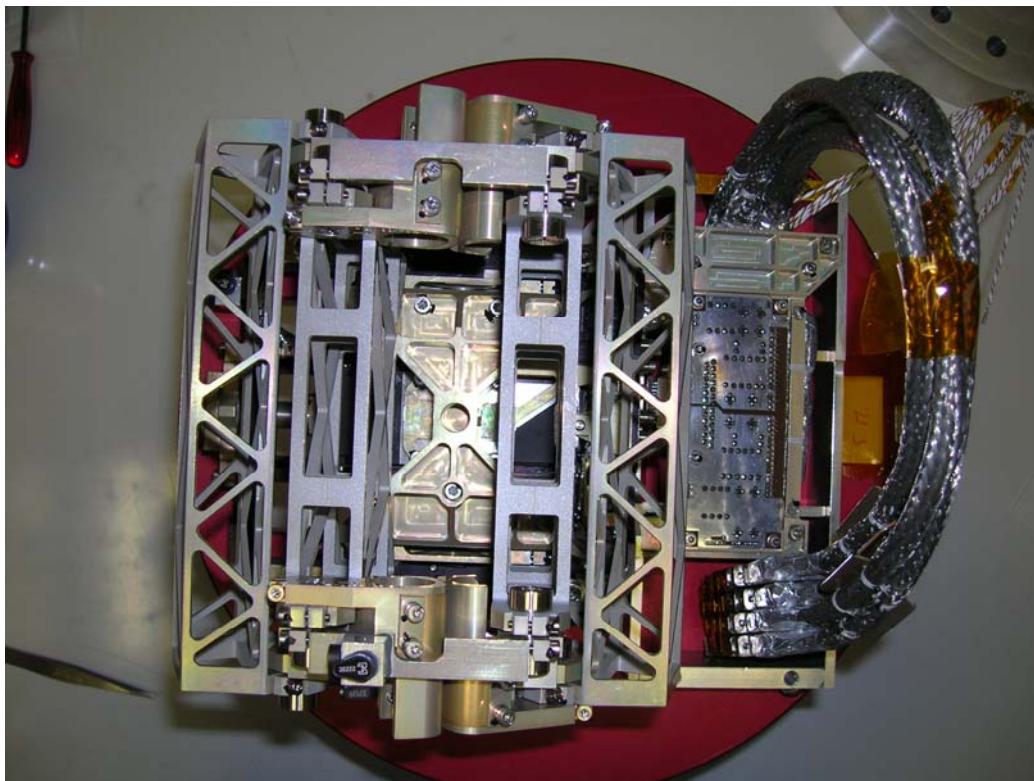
SMEC on its mounting tool equipped with the RIB simulator
